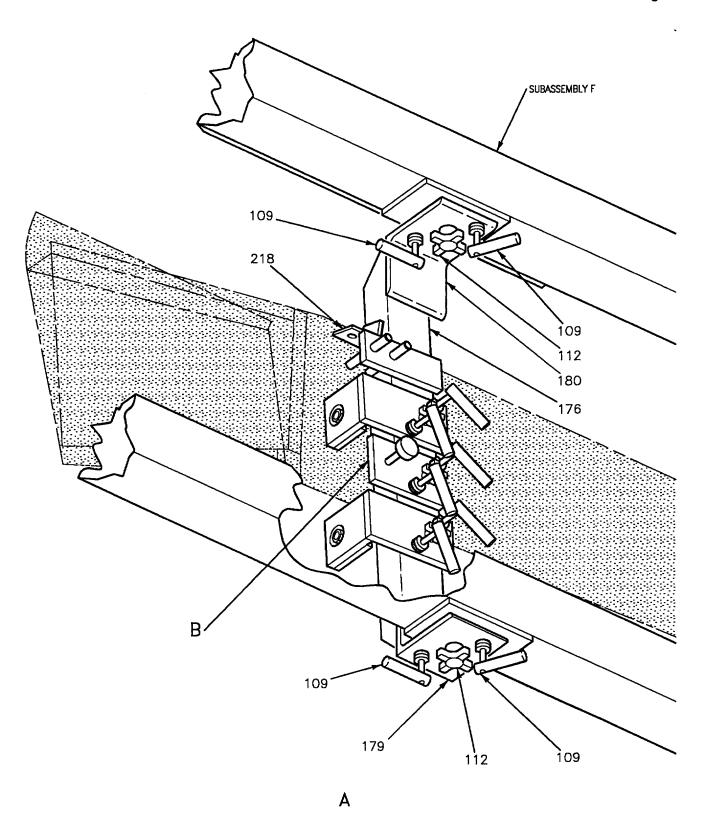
Inboard Drive Arm, 74A180728 (Sheet 2)
